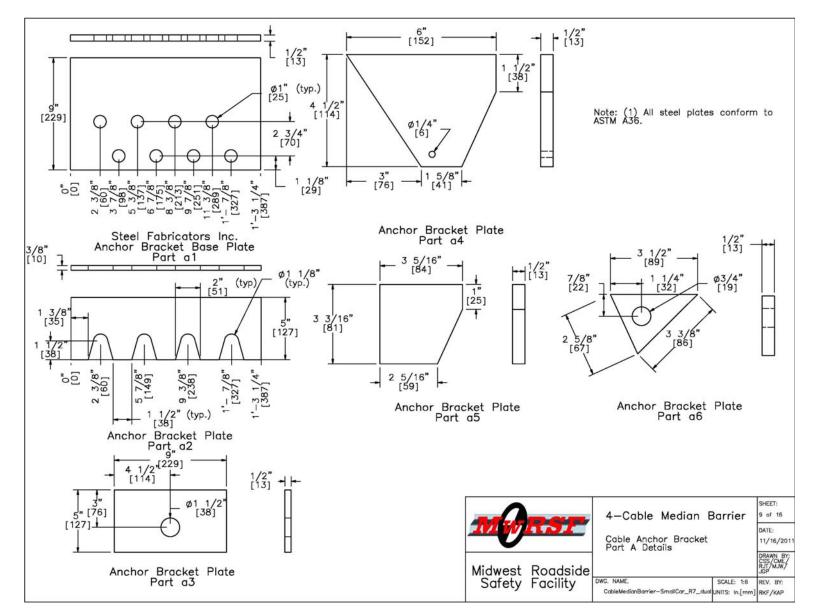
Cable Anchor Bracket Details, Test No. 4CMB-2
